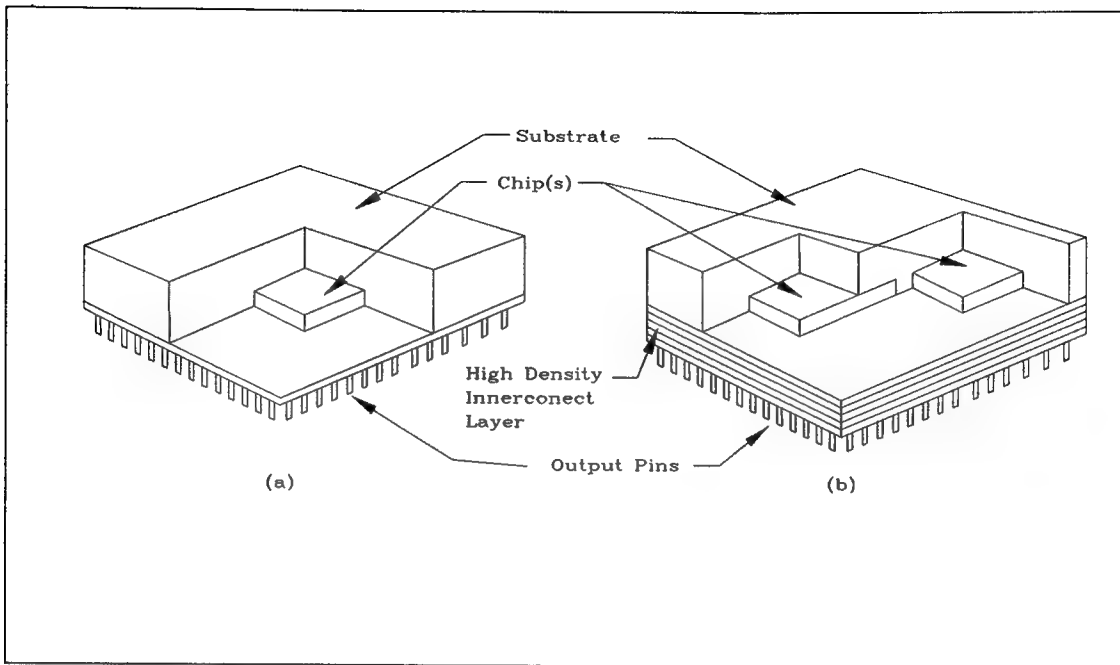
Schematic showing a cutaway view of (a) a typical electronic package (b) a multi-chip module (MCM). Note that drawing is not to scale.
